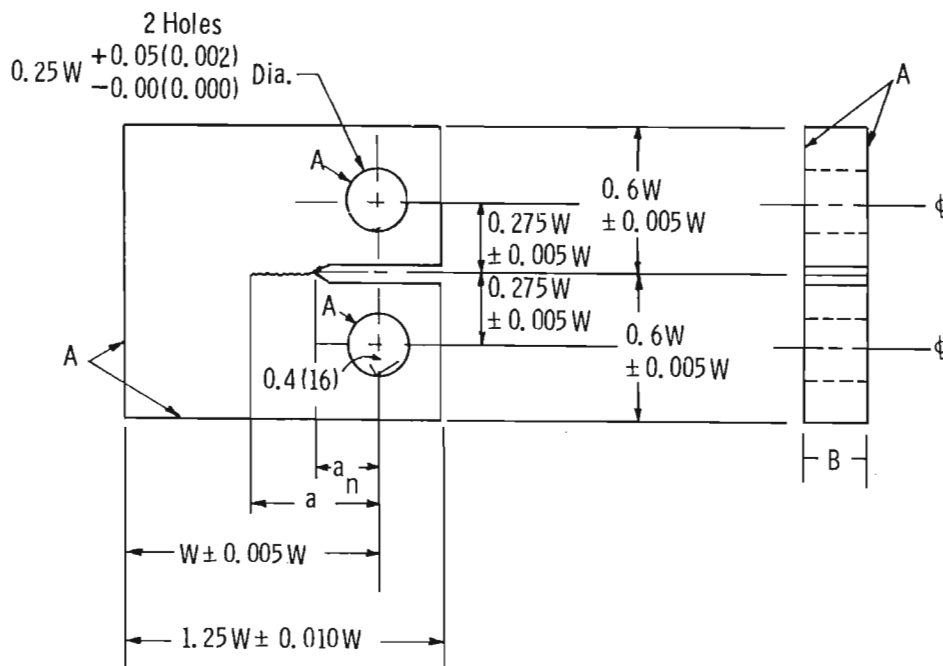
ASTM 647 - E88a recommended dimensions for LEFM compact tension (C(T)) test specimen
